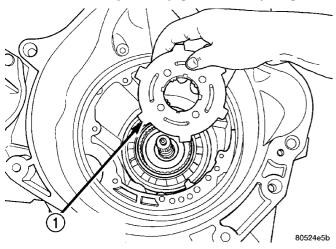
Rear Planetary Gear Assembly 1 - REAR PLANETARY GEAR ASSEMBLY (8) Install #9 thrust washer (Fig. 50). Use petrolatum to secure.
